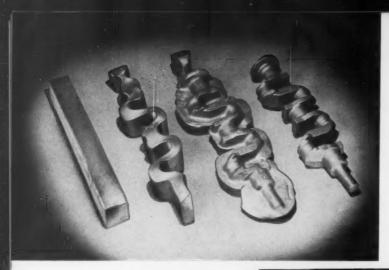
(Left) This view shows (beginning at left) the billet; and the crankshaft after edging and blocking, after finishing, and after trimming and restriking.
